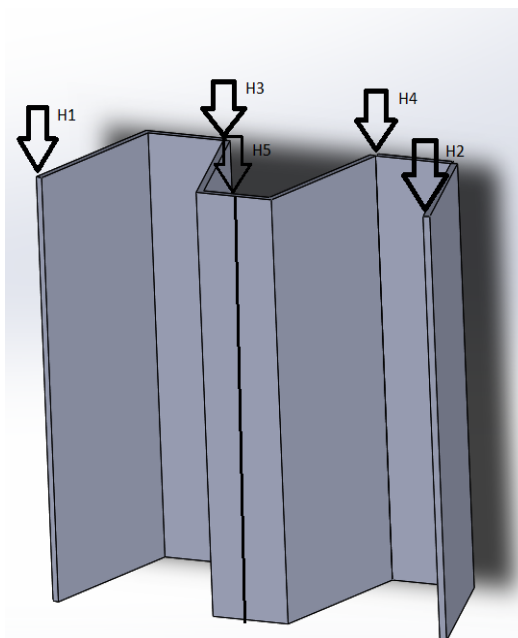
Technical drawings of W01& W02 shaped profile with 3-D geometries
